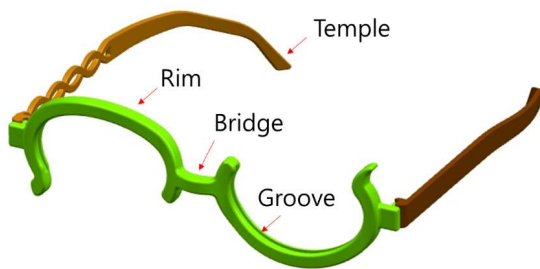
Three-dimensional view of the designed glass frame with a snake shape
